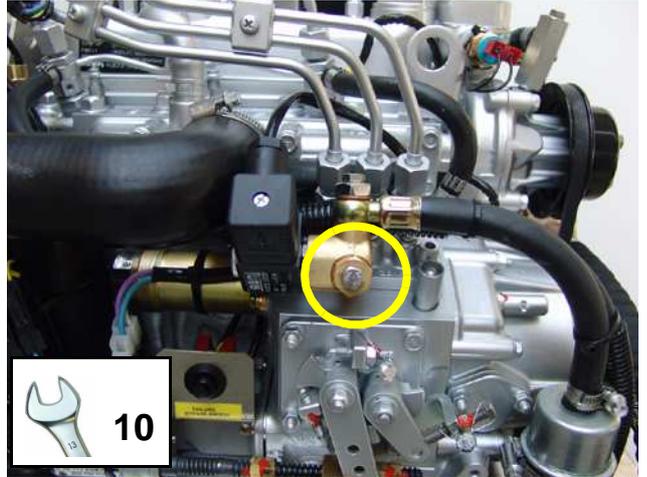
Ventilation screw - fuel solenoid valve
